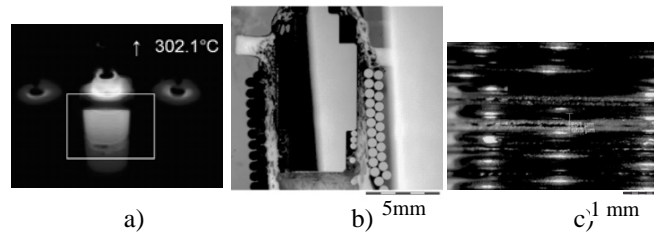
Thermographic picture ² a), molten coil former b) and damaged coil wire insulation c) (Prod. A)
